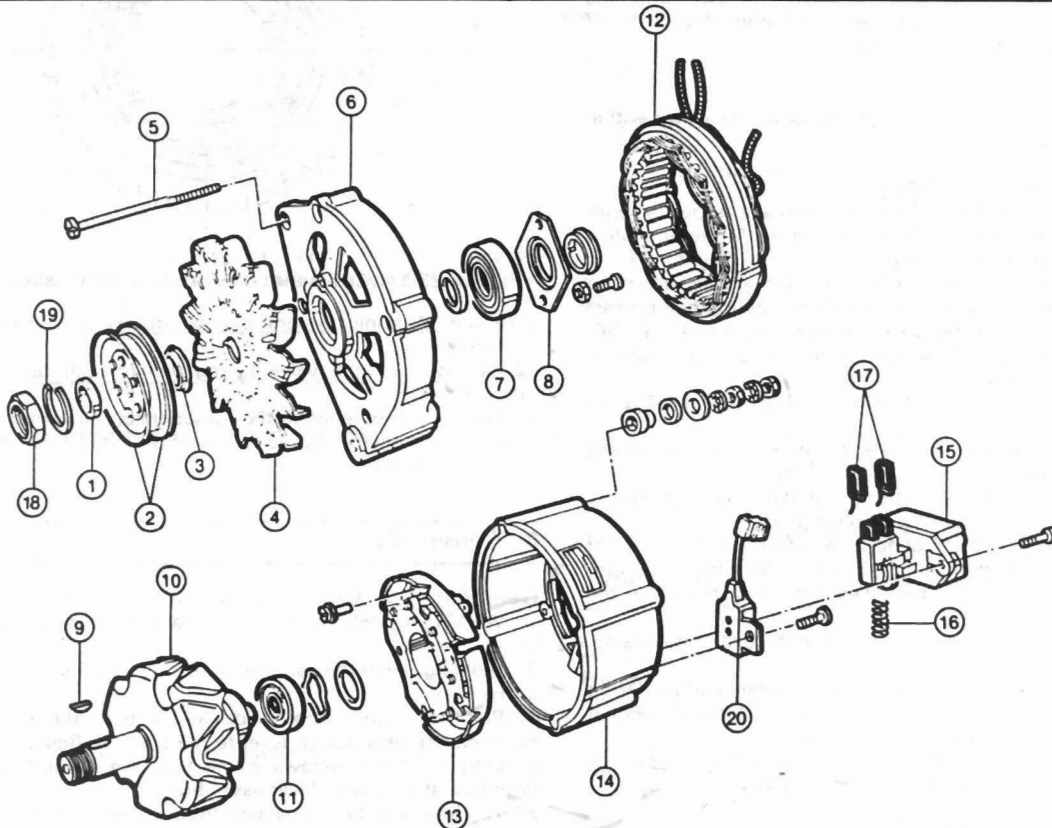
Exploded view of Bosch alternator (Sec 9)
